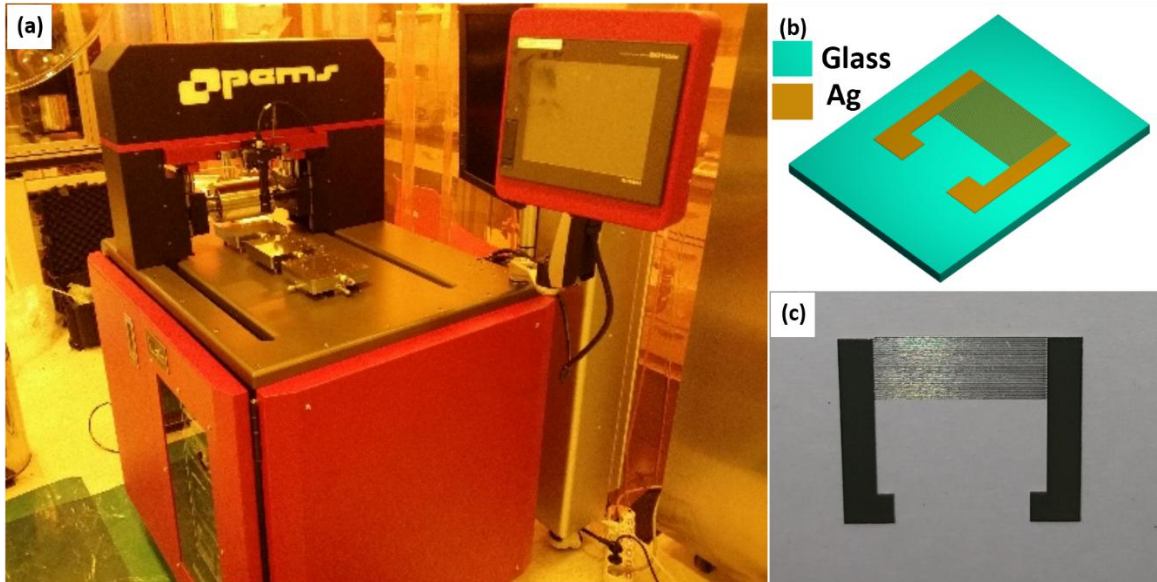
(a) Real photograph of reverse offset printing system, (b) CAD design, and (c) real photograph of the Ag IDTs printed on glass.
